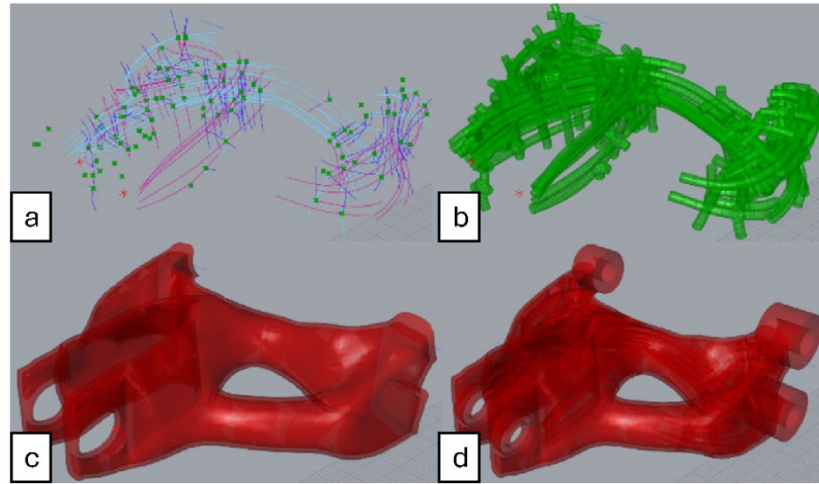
SLAM geometry generation: points and flow lines (a); solid pipes (b); outer skin (c); final assembly (d)
